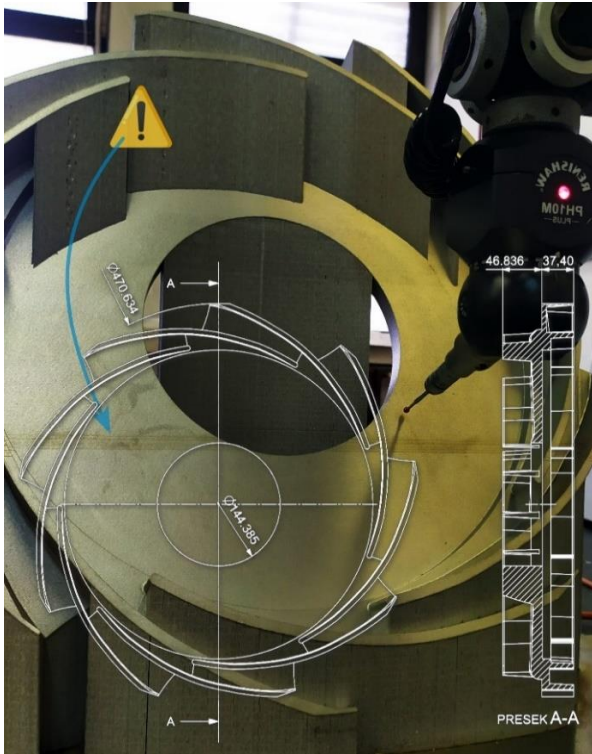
Diffuser N°3 on the CMM & touch trigger probe measuring path
